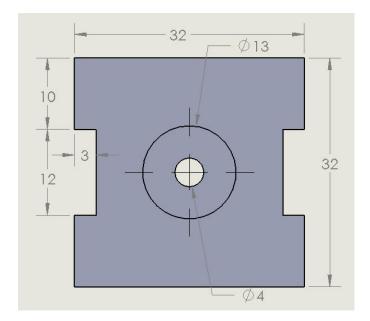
The top view of the slider. All values shown in this figure is in millimeters. The hole in the center is where the drill bit would enter. All measurements are in millimeters.
